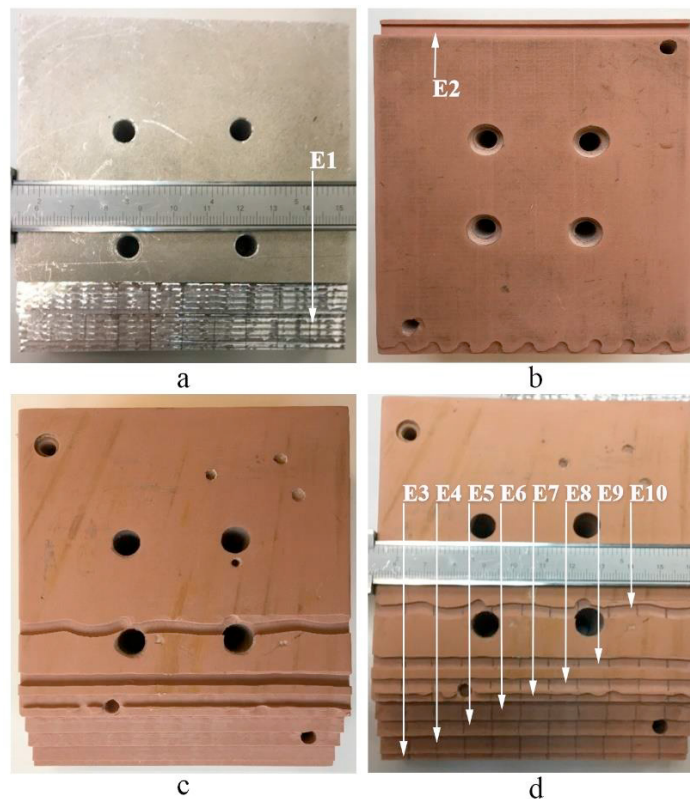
(a) Machined aluminum part; (b) Machined resin part face a; (c) Machined resin part face b; (d) Machined resin part with experiments.
